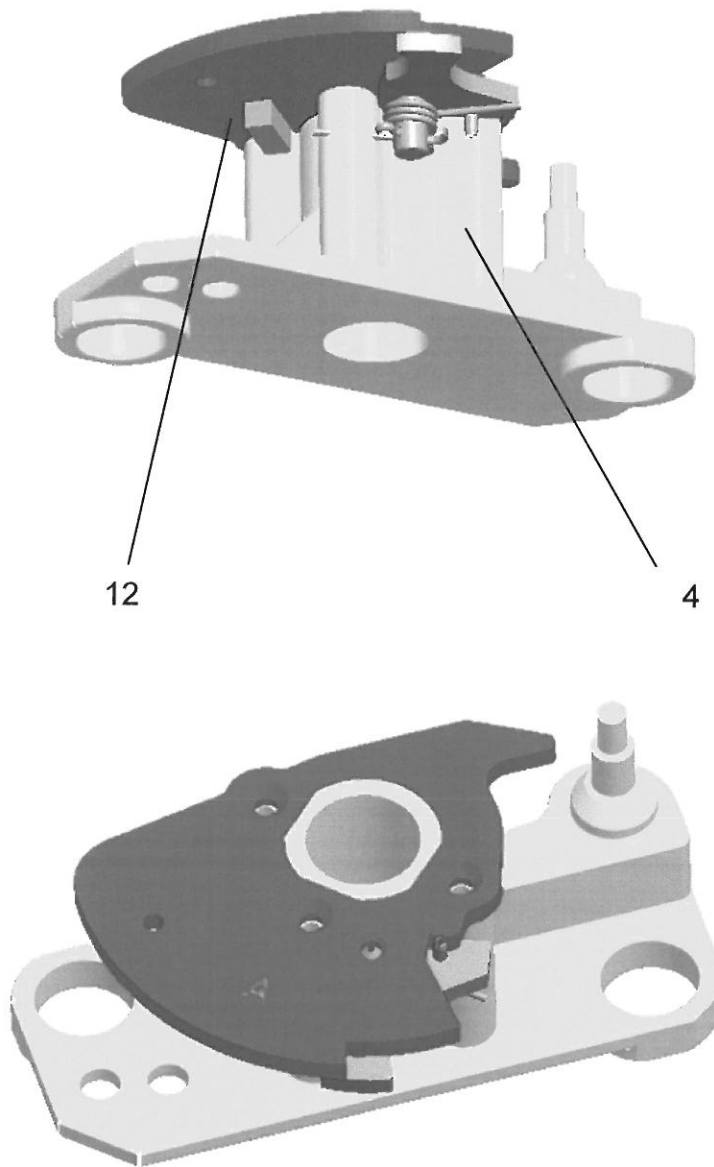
Cam 50726261, and 50726261-01 installed on teeter lever base.
